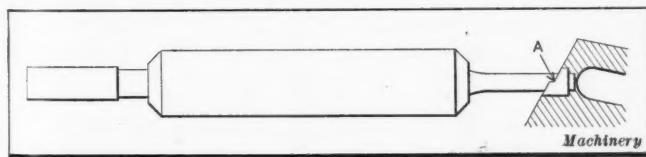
Gage for testing Diameter and Depth of Flash Hole in Bottom Ring
